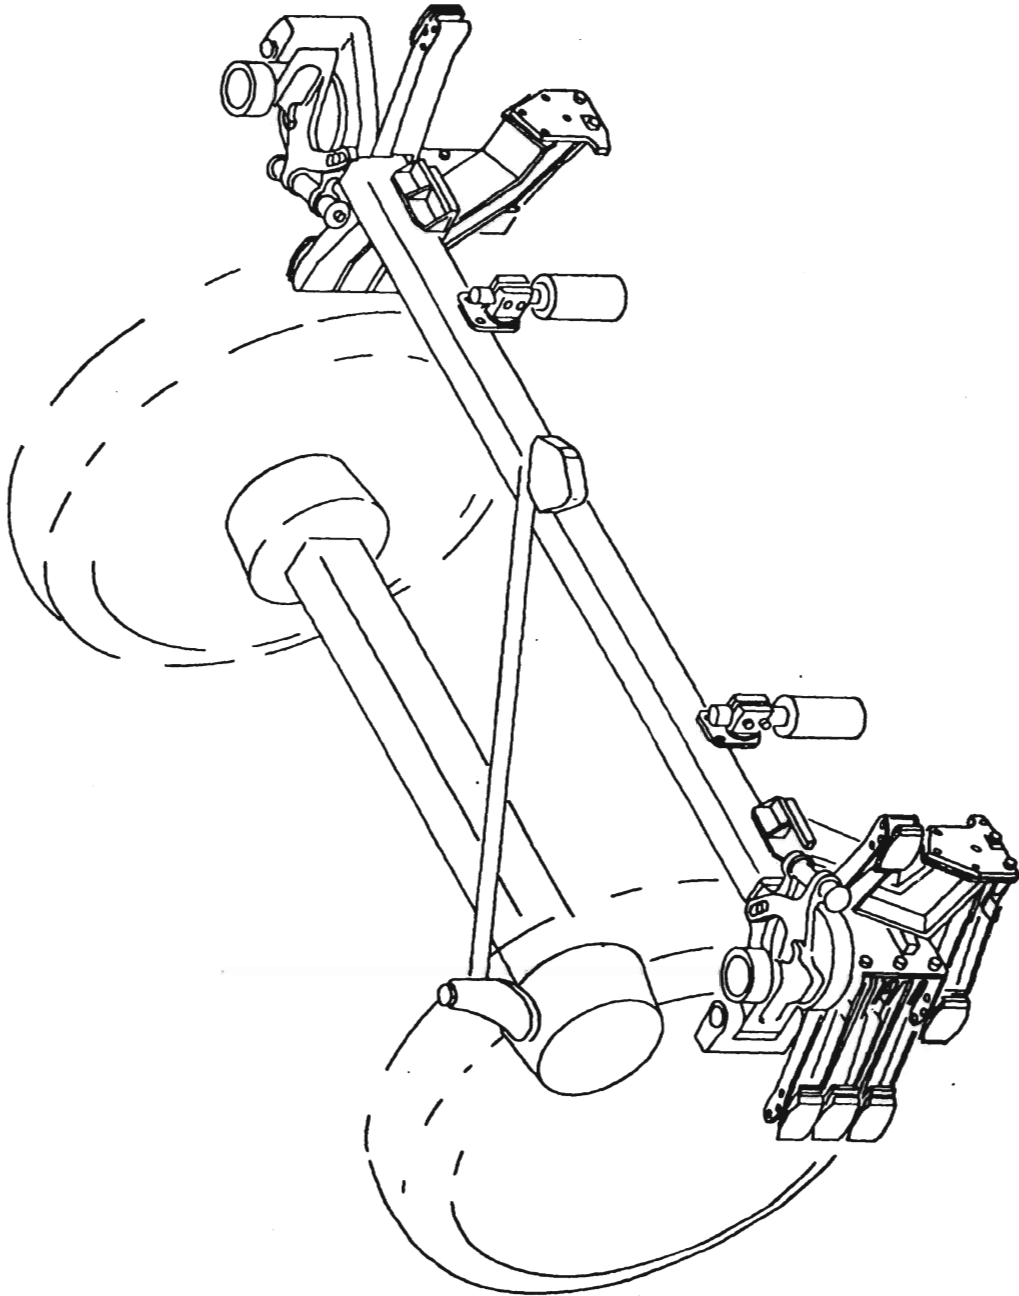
IMPROVED MECHANICAL STEERING AND COLLECTORS
